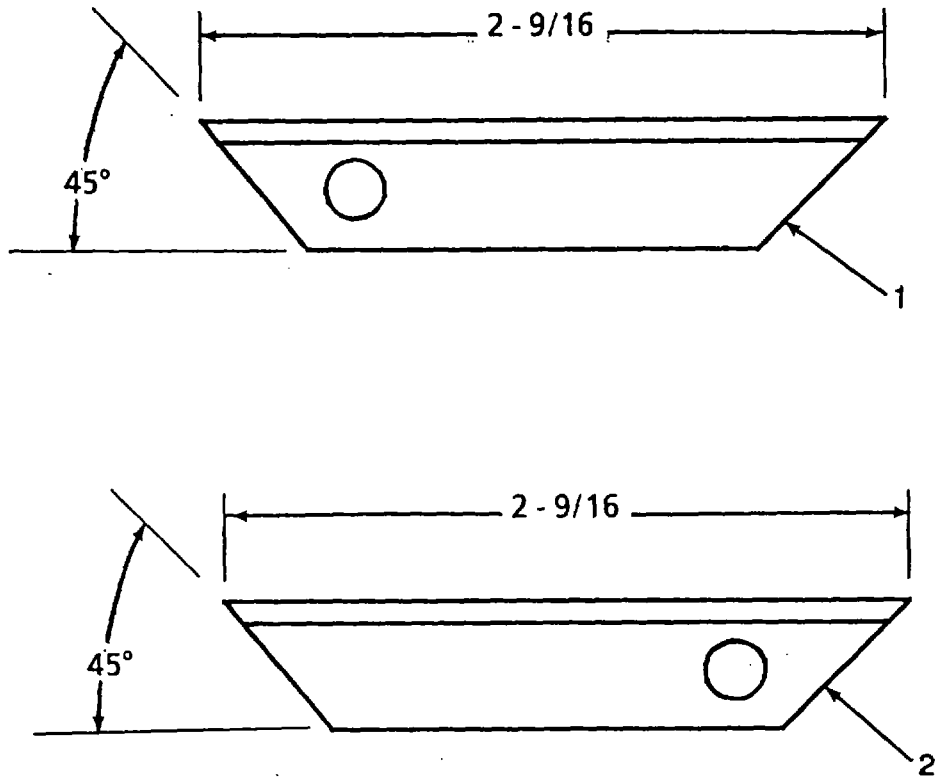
Insulation Sleeve, Thermostat AssemblyF-36
